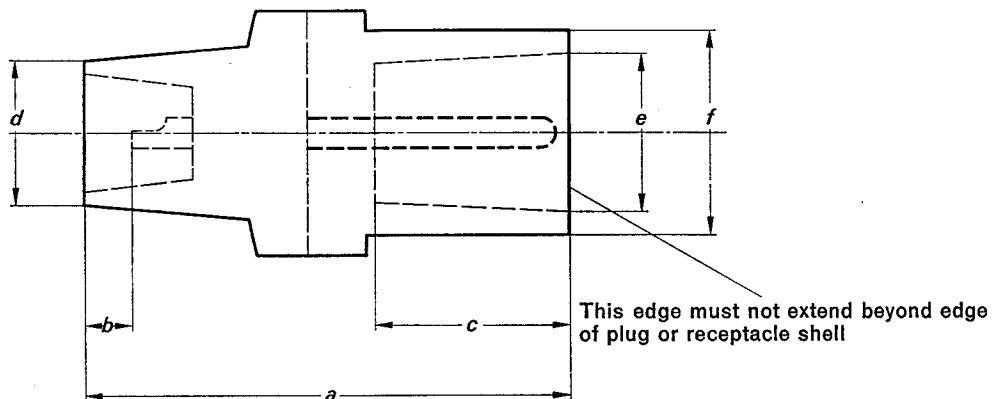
Pin insert for connector with arrangement 18-16.
